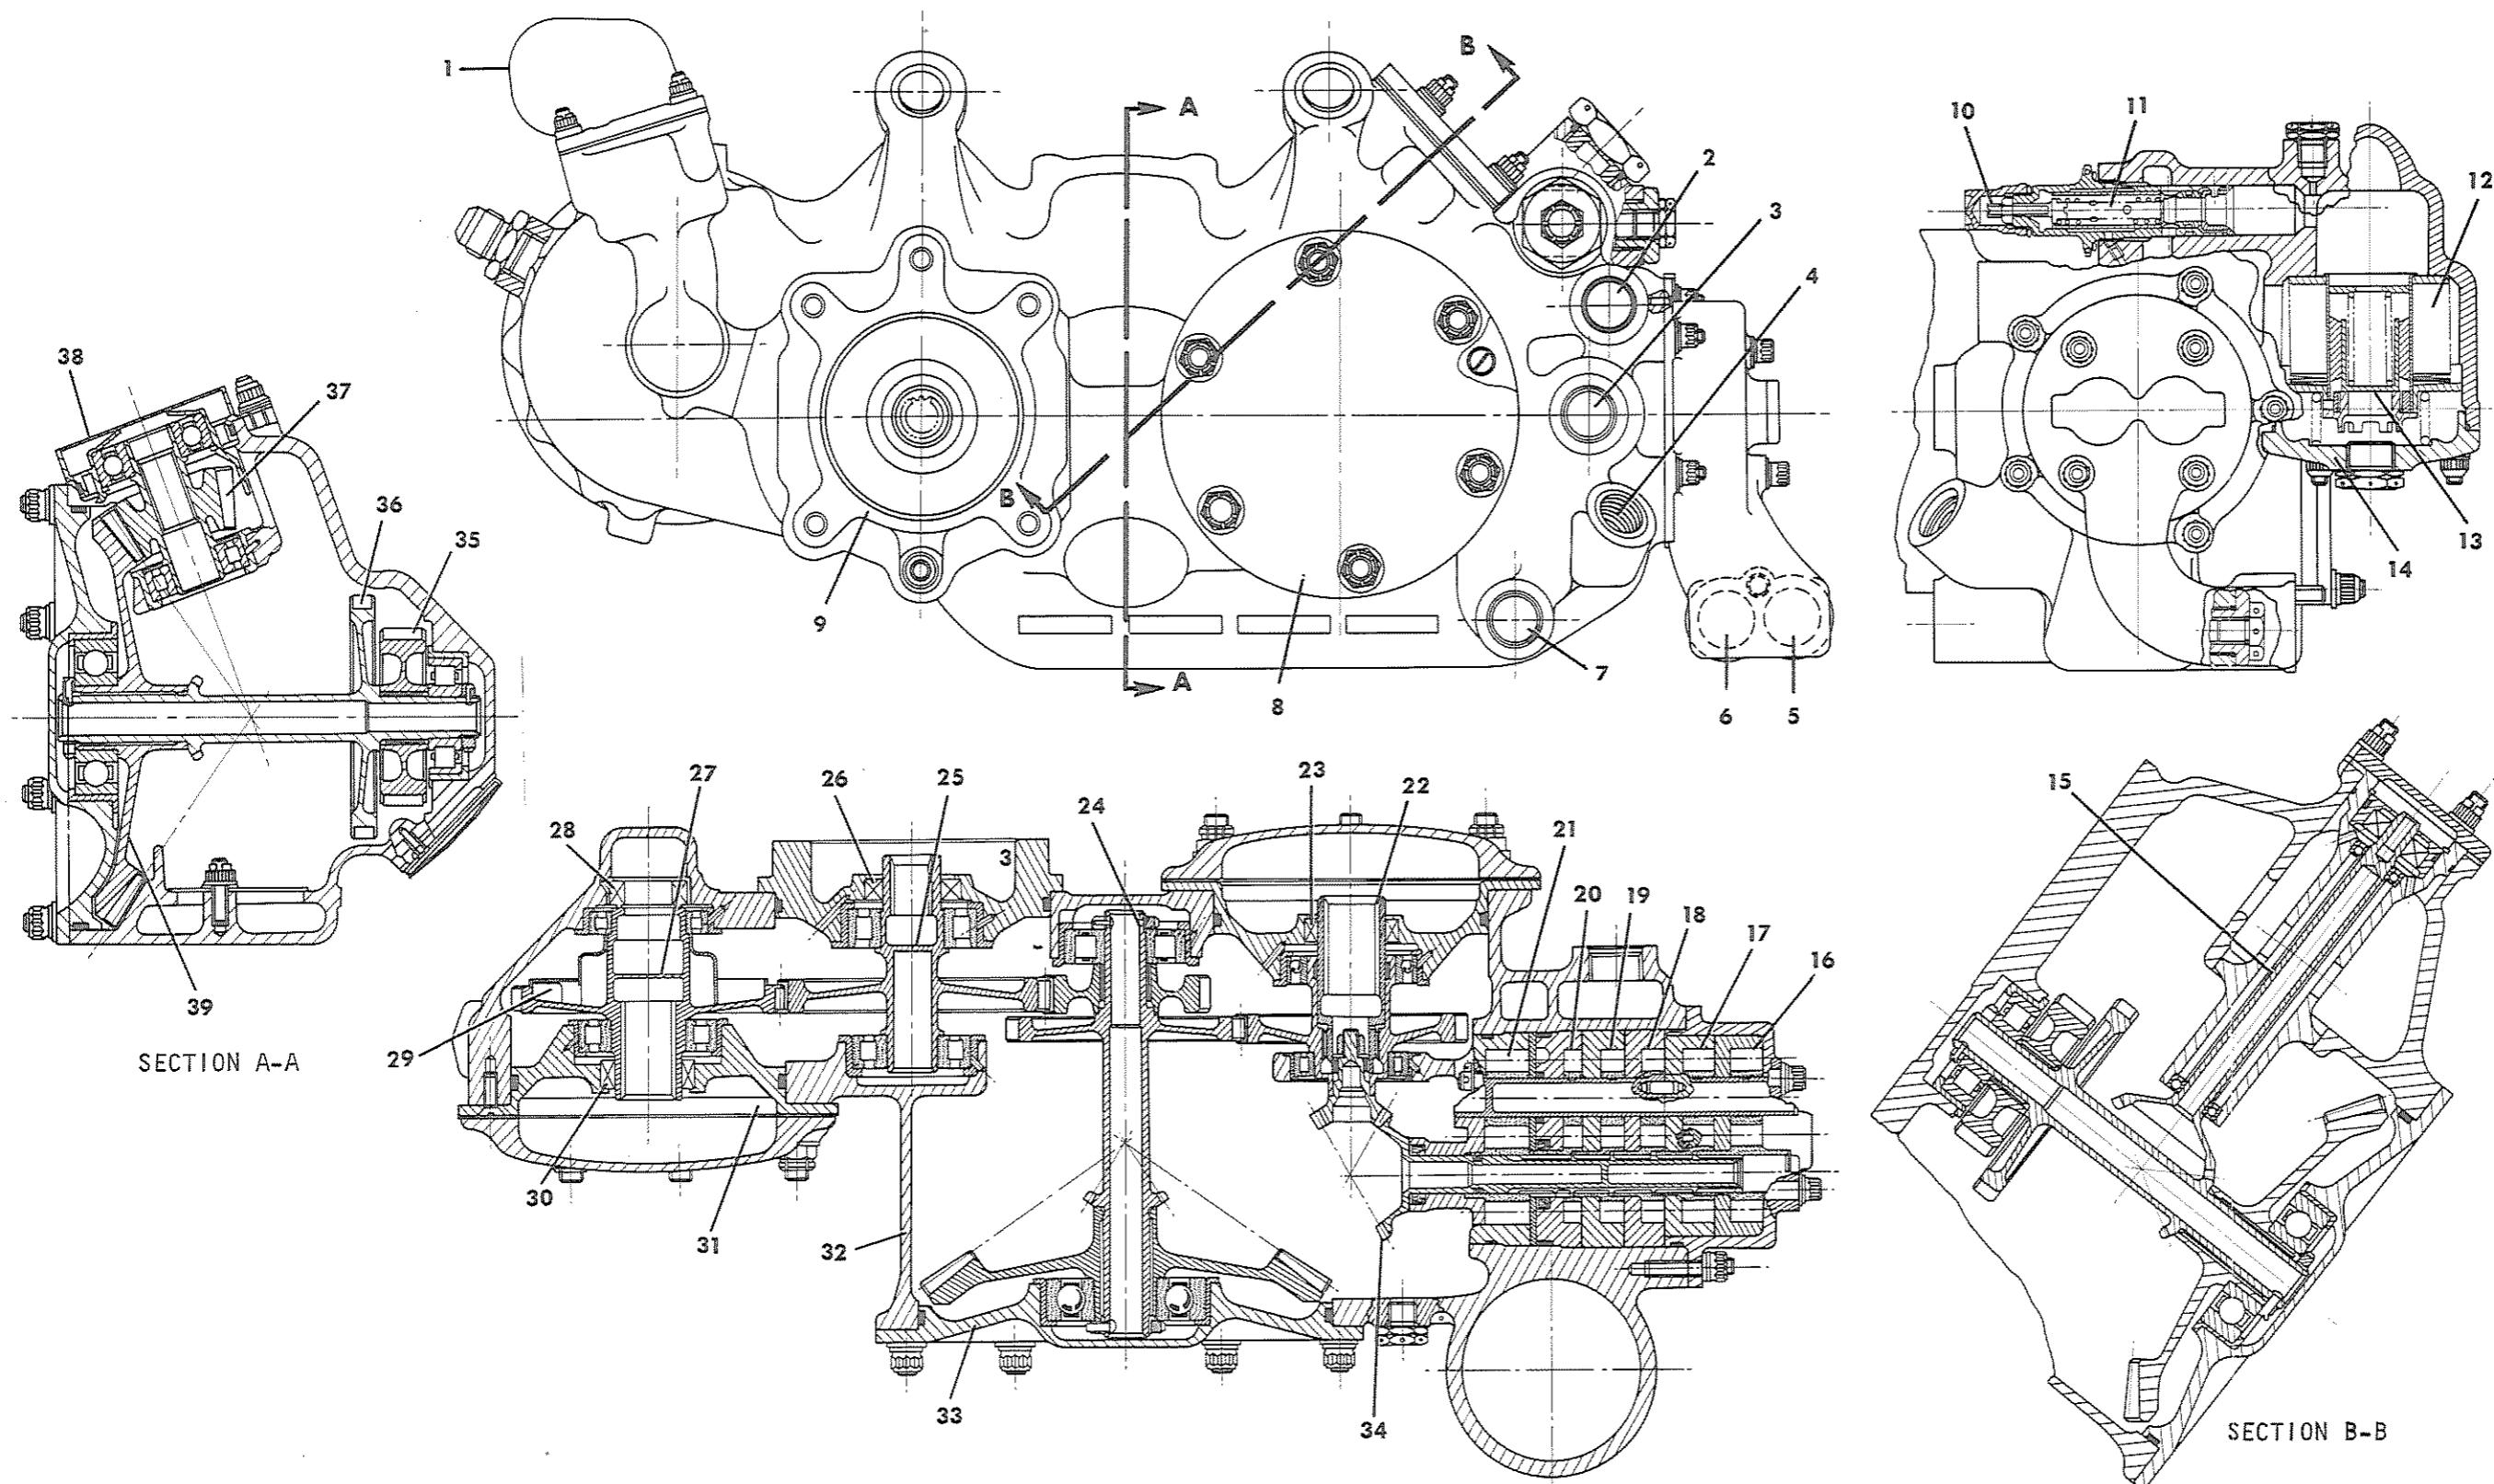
C. Cross Sectional View of Component Drive Gearbox (JFTD12A)
